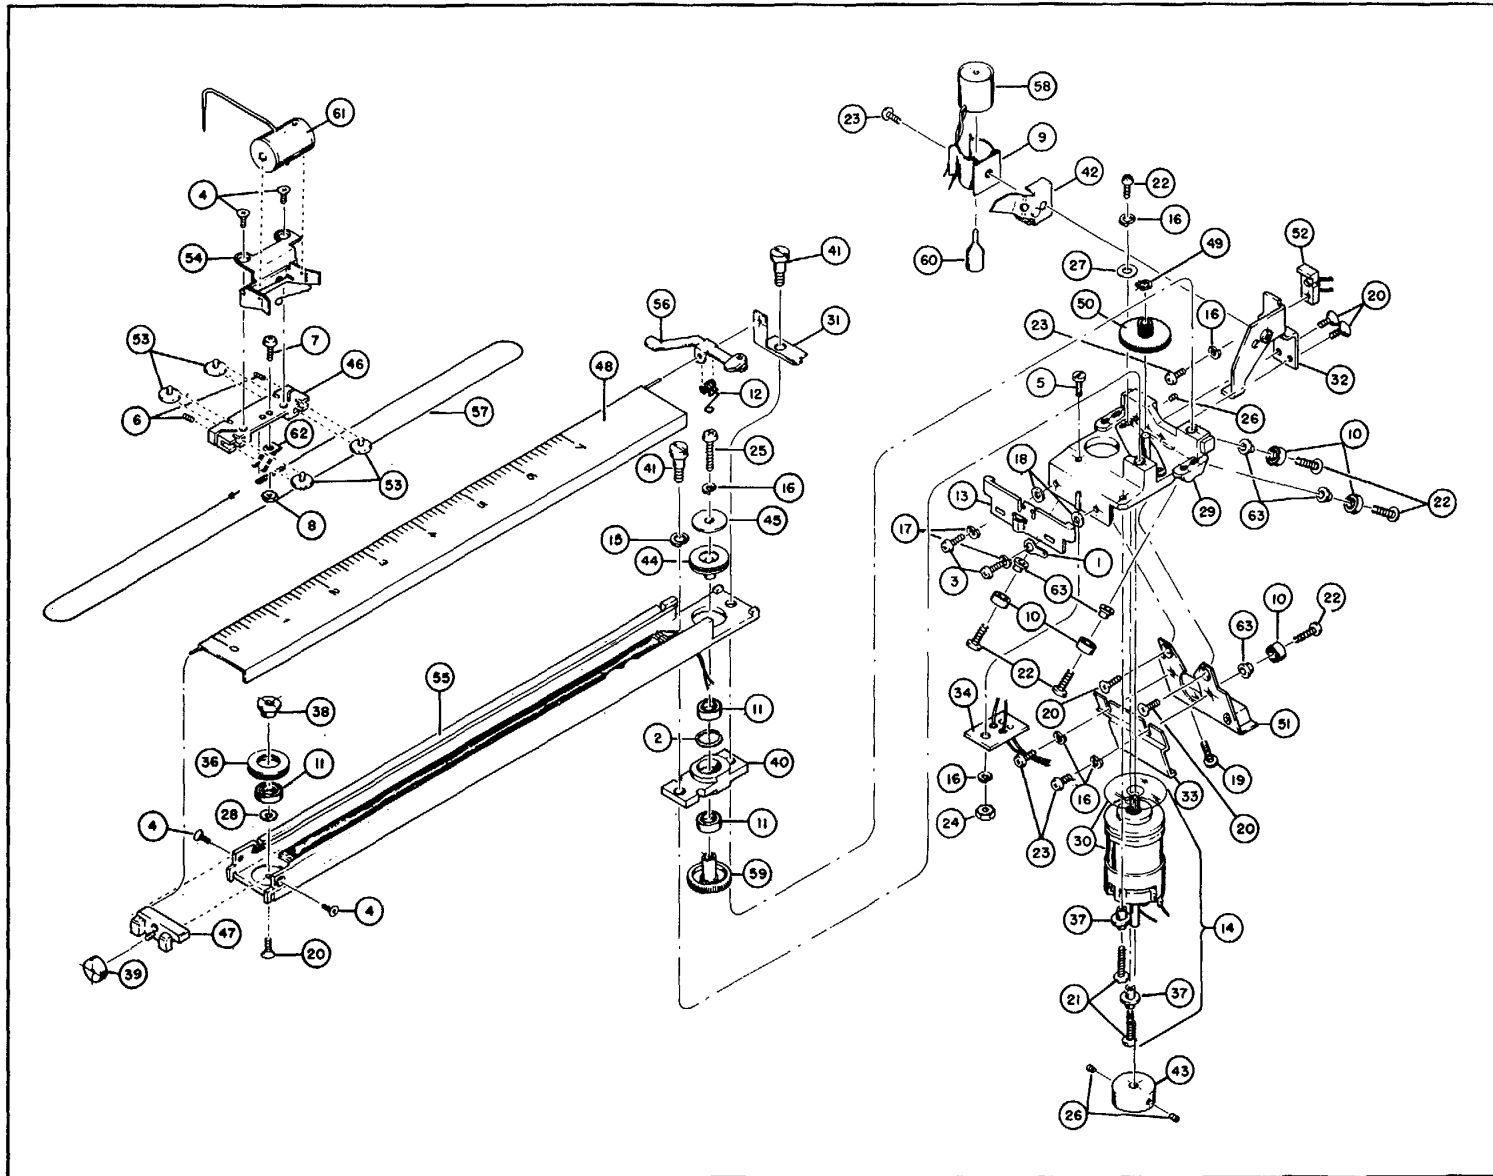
EXPLODED VIEW - CARRIAGE ARM
